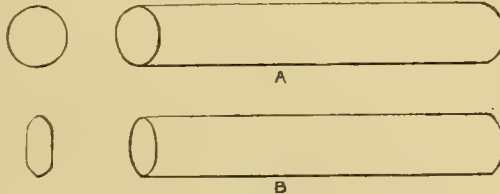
PUNCHES USED IN LEAD BOSSING.
